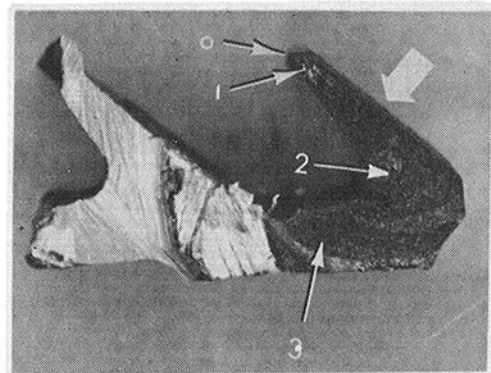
Inner seal fatigue crack. Dark, oxidized area is the fatigue crack. O denotes fatigue origin; 1, 2, 3 = progression of the crack
